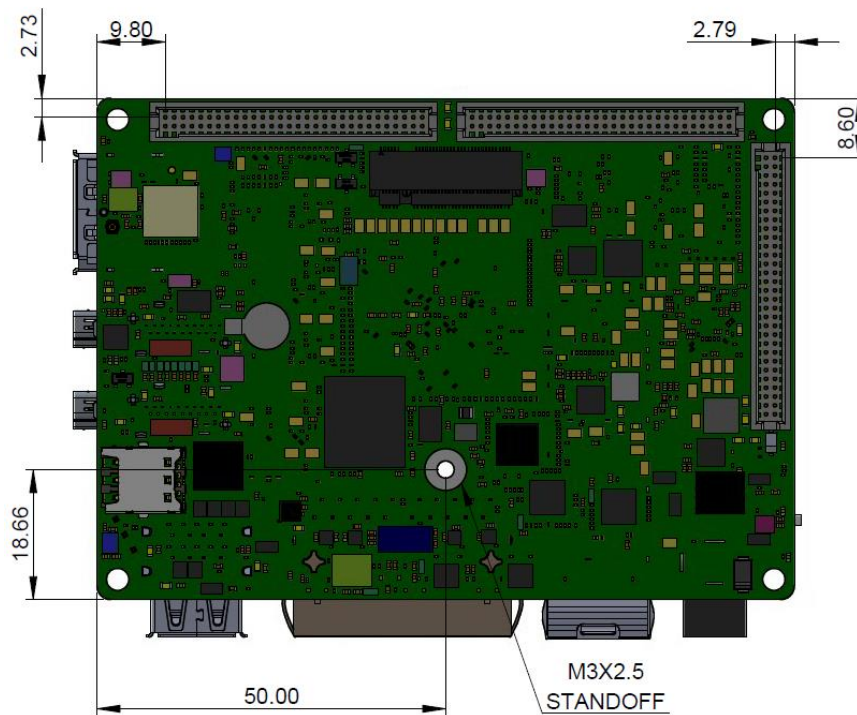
Mechanical dimension of Zynq Ultrascale+ MPSoC SBC - Bottom View
